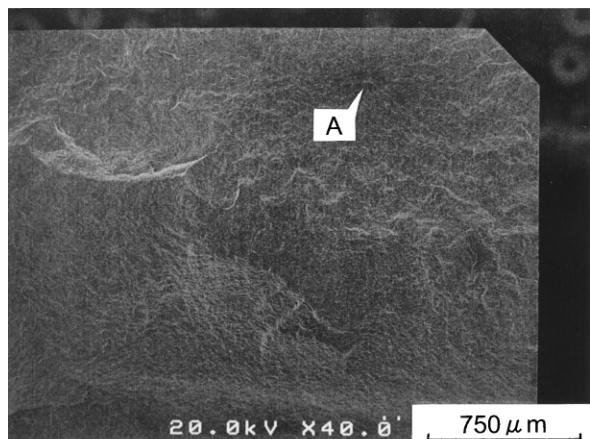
SEM photographs of the fracture surface of the SN-SC-Y8(C) smooth specimen.
